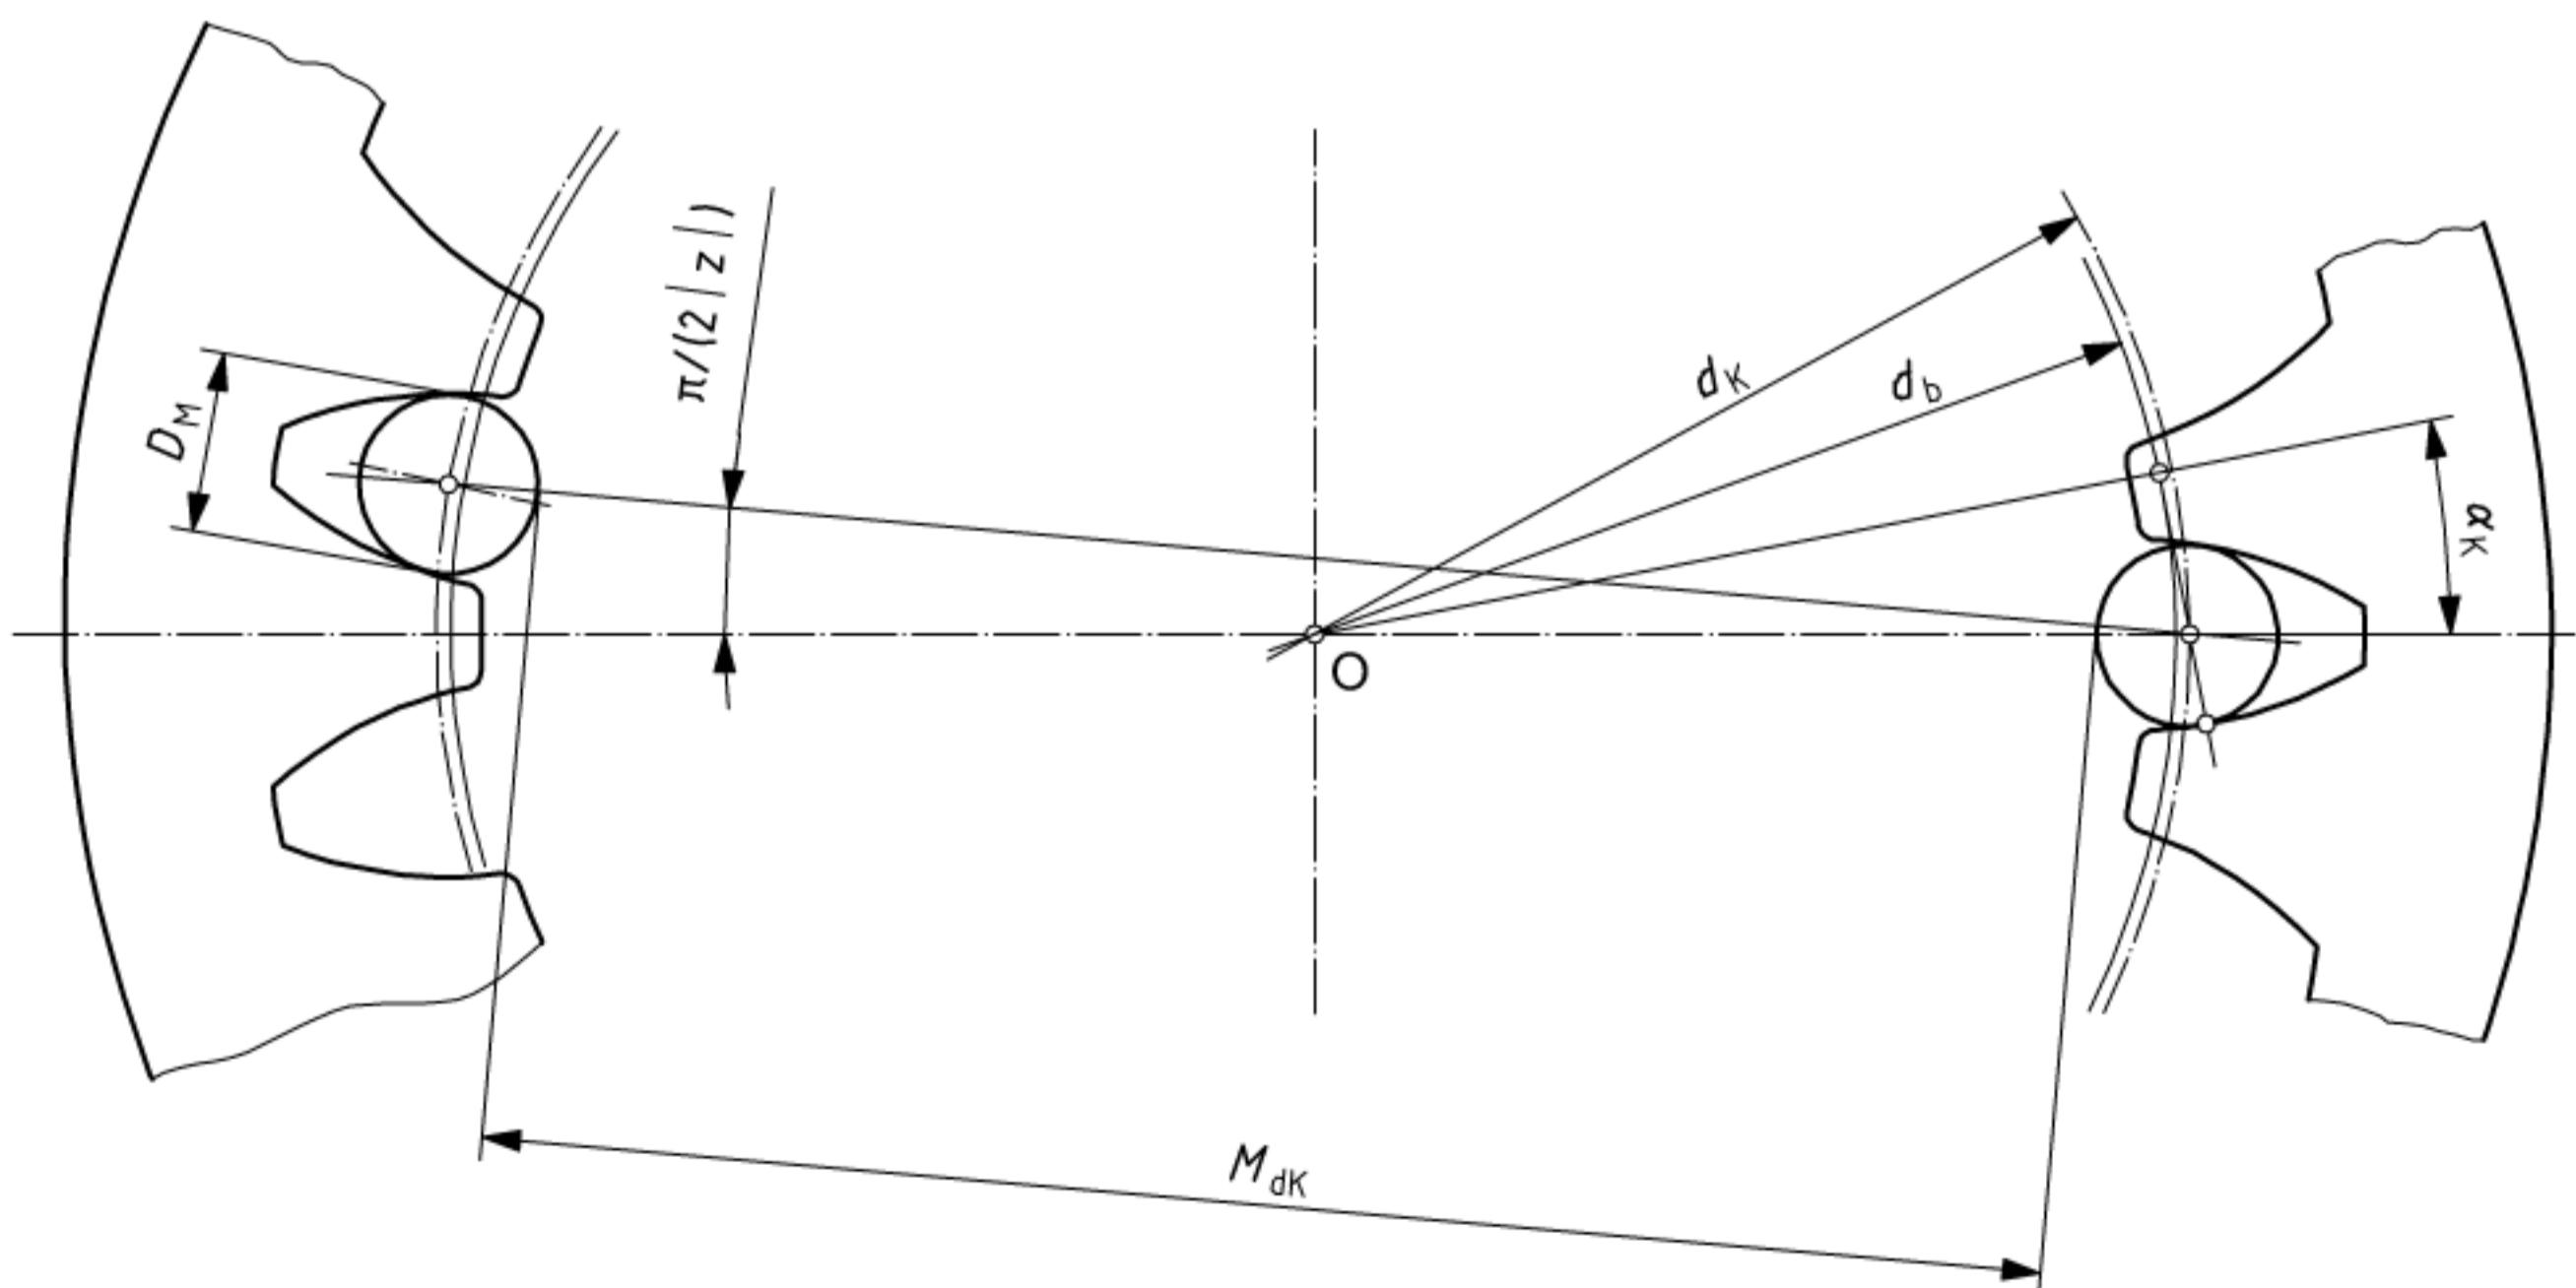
Dimension over balls M_{dK} in the case of internal spur gear with odd number of teeth
